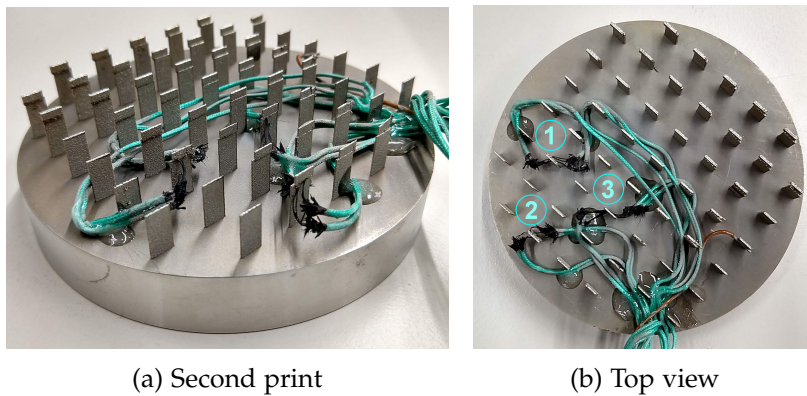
Arrangement of thermocouple wires for the second print in the SLM machine.
